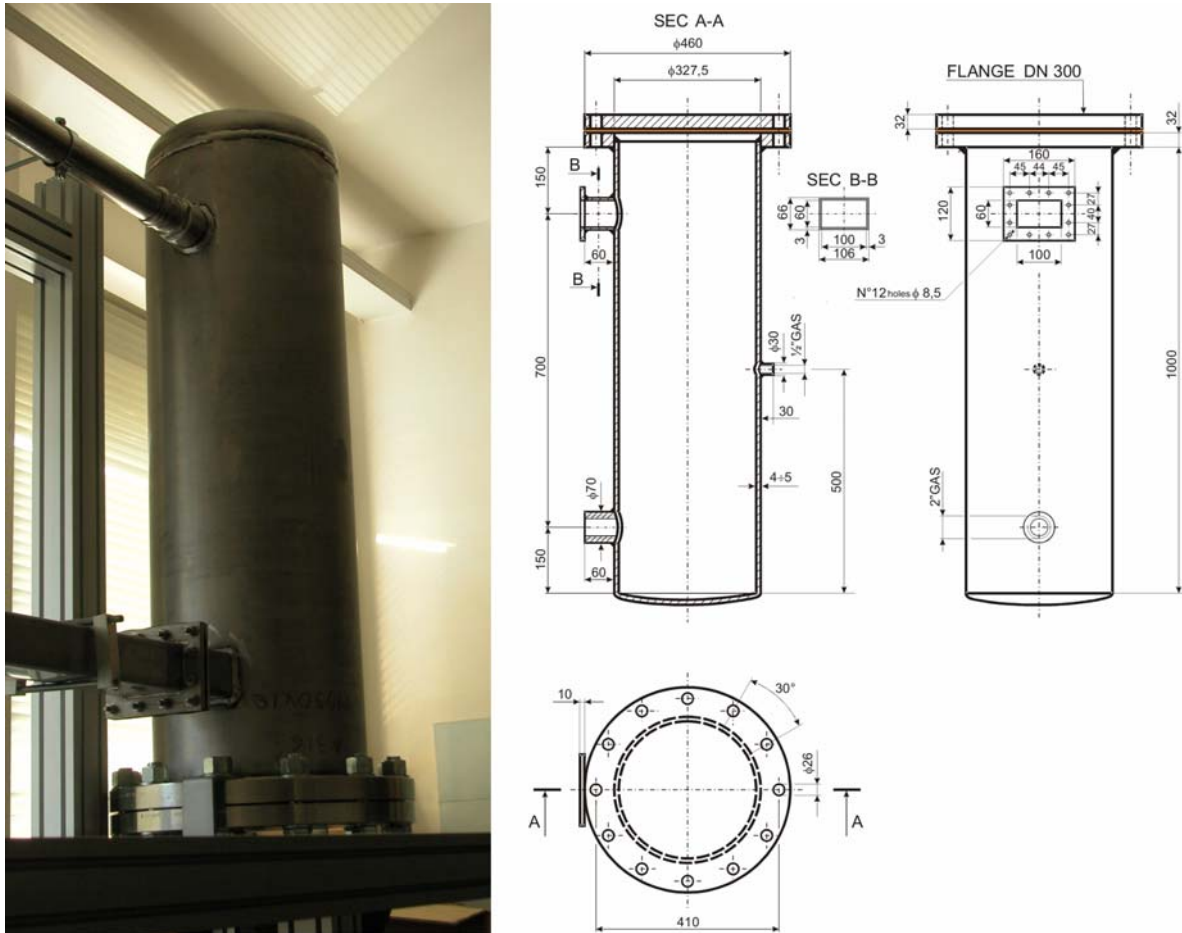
Photo and executive technical drawing of the 70 liter calm chamber.
